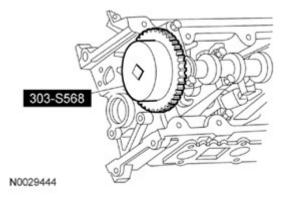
Installing/Removing Camshaft Alignment Set Courtesy of FORD MOTOR CO.
